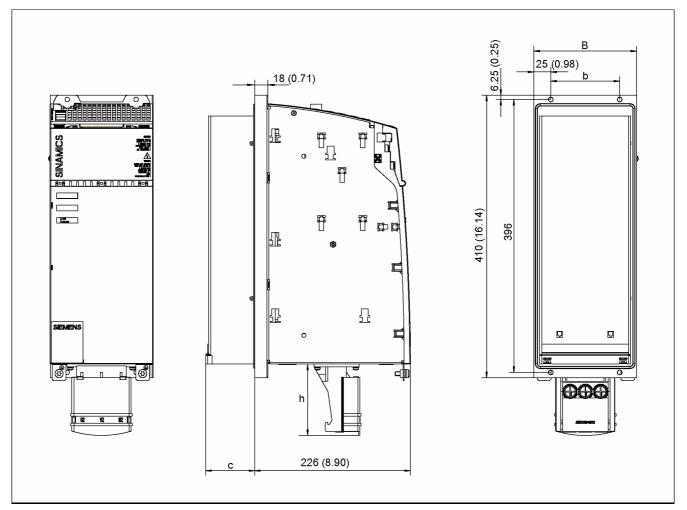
Dimension drawing of motor module with external air cooling (45 A, 60 A, and 85 A)
